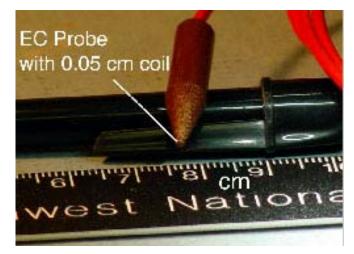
Custom ET probe fabricated by PNNL [0.5-mm (0.020-in.) diameter] to examine finely threaded parts such as gear teeth and bolts.
